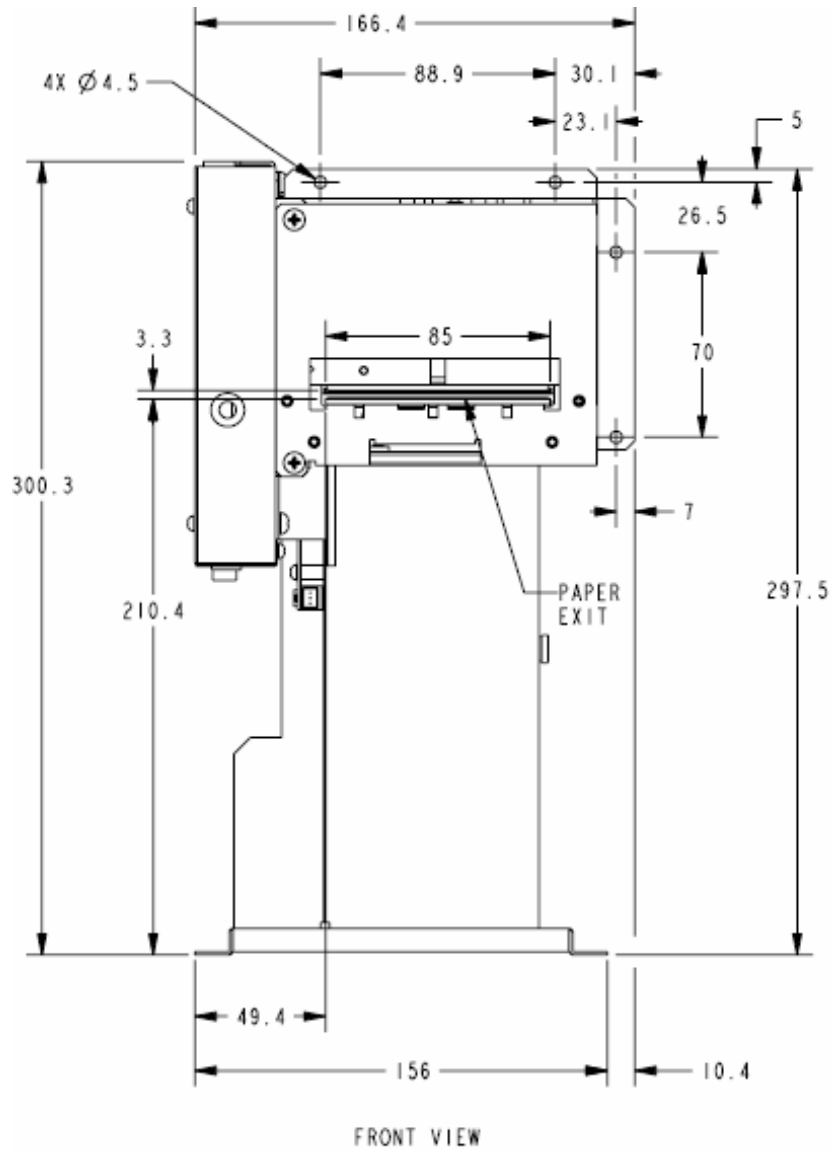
Mechanical Dimensions - High Speed Kiosk Vertical Front View
